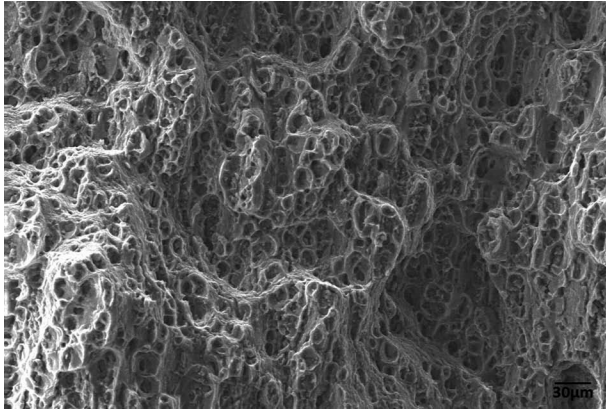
High magnified image of fracture surface shown in Fig. 225
